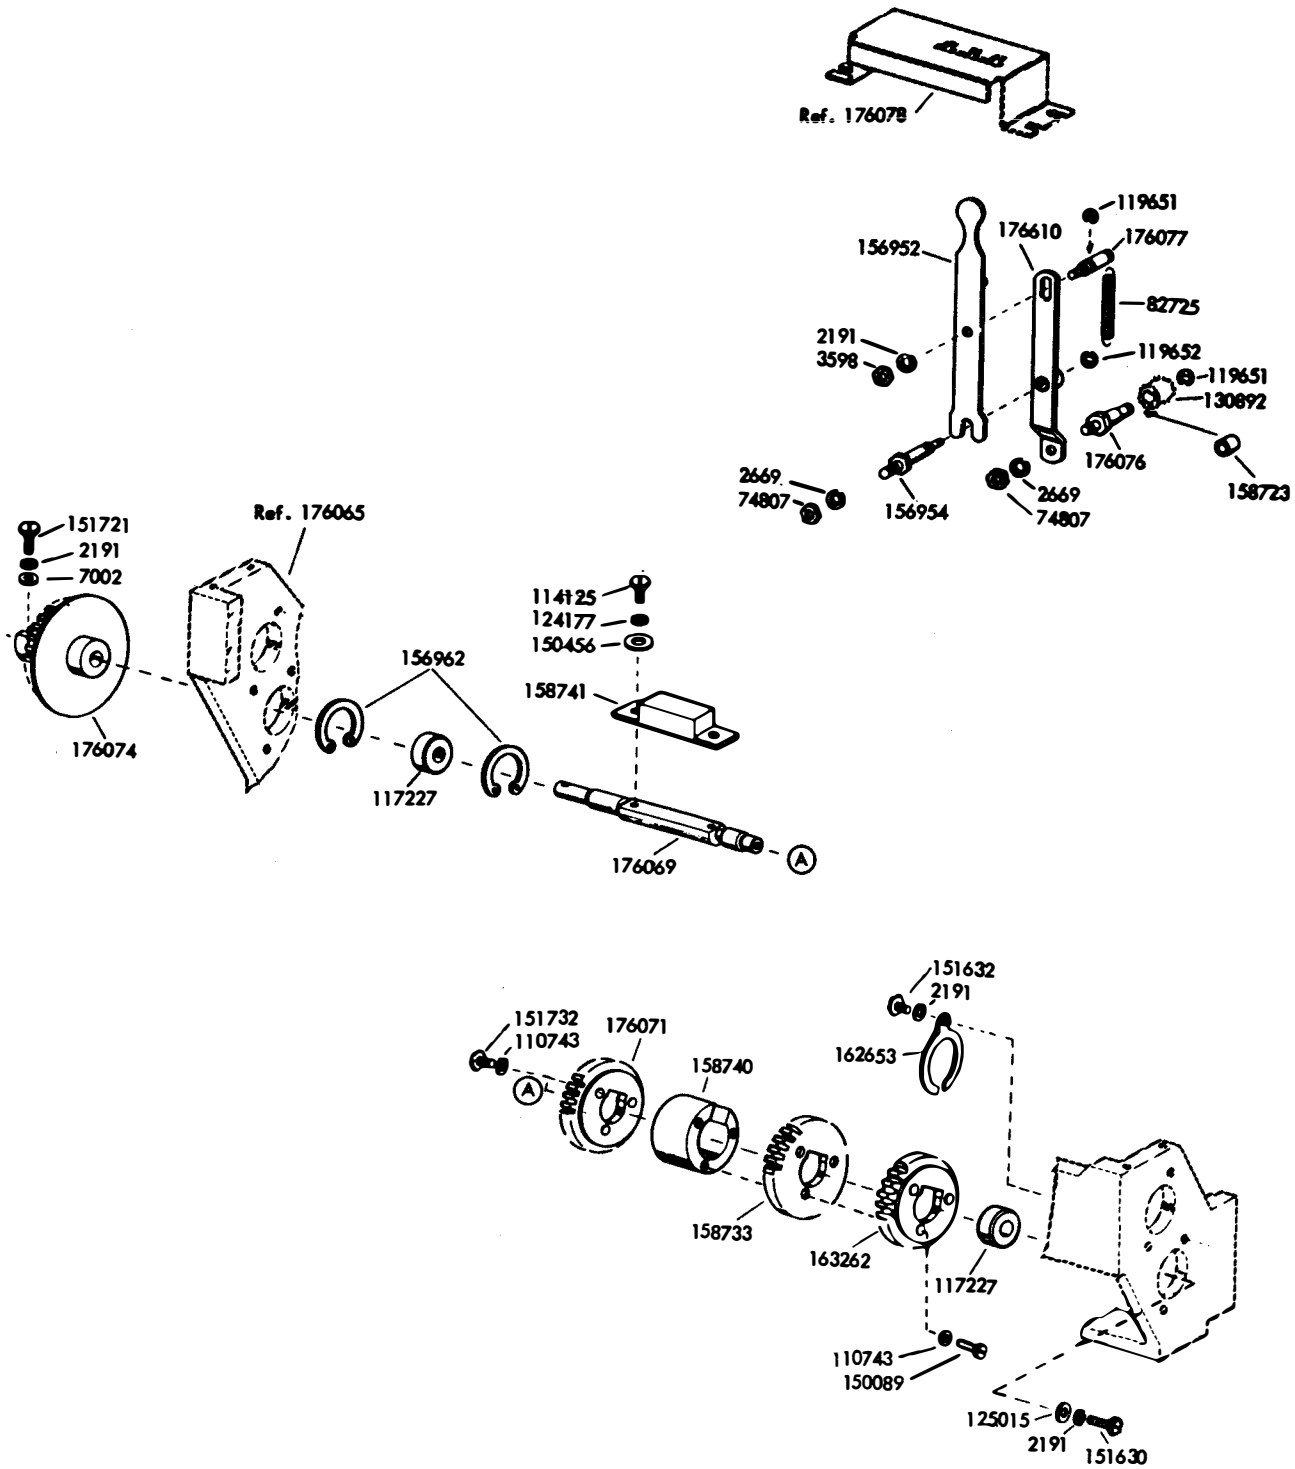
Variable Speed Mechanism Assembly 176100 (Compact Receiving-Only Reperforator) (Sheet 2 of 2)
